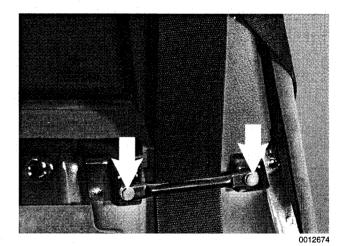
B-pillar trim removed to show seat belt cross-bracket bolts (arrows).
